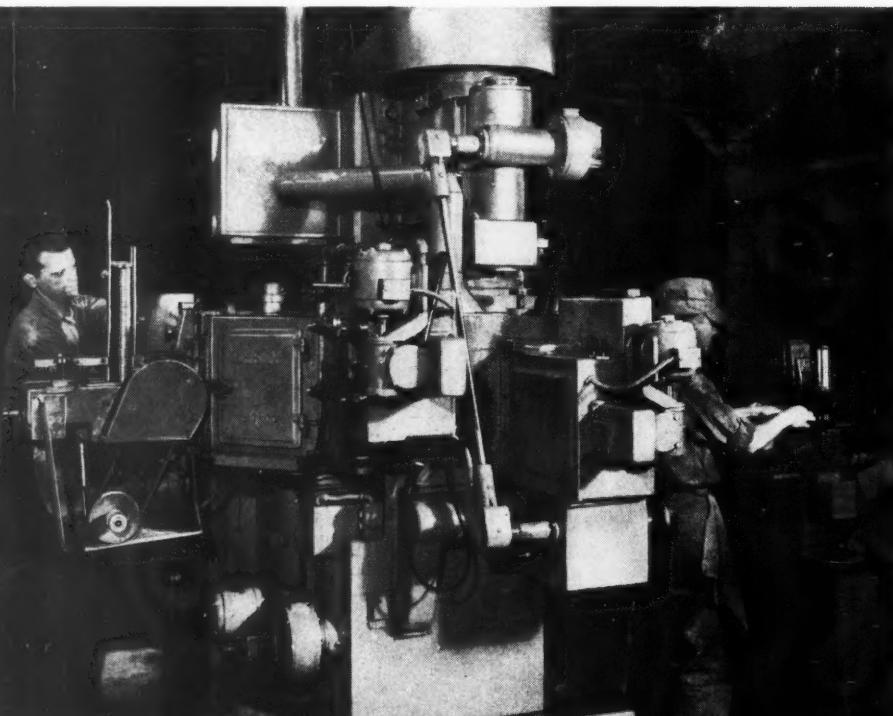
Finish-grinding faces of piston-rings to within 0.0005 inch is achieved at a high rate of production on this special vertical Besly grinder
